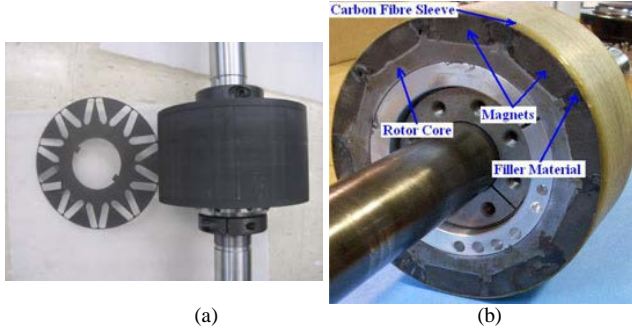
a) IPM machine rotor; b) SPM machine rotor [17].
